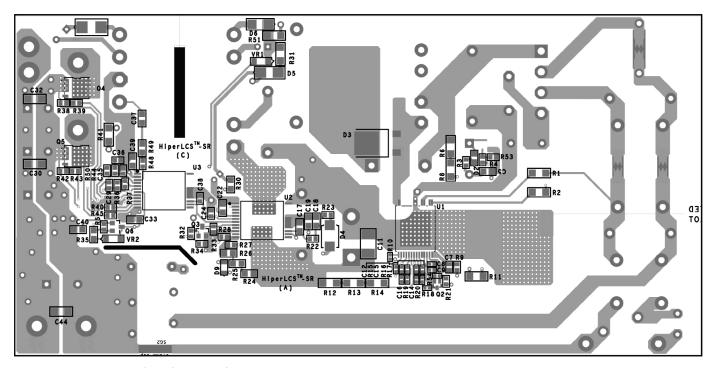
PCB Layout 220 W / 24 V (Bottom View).
